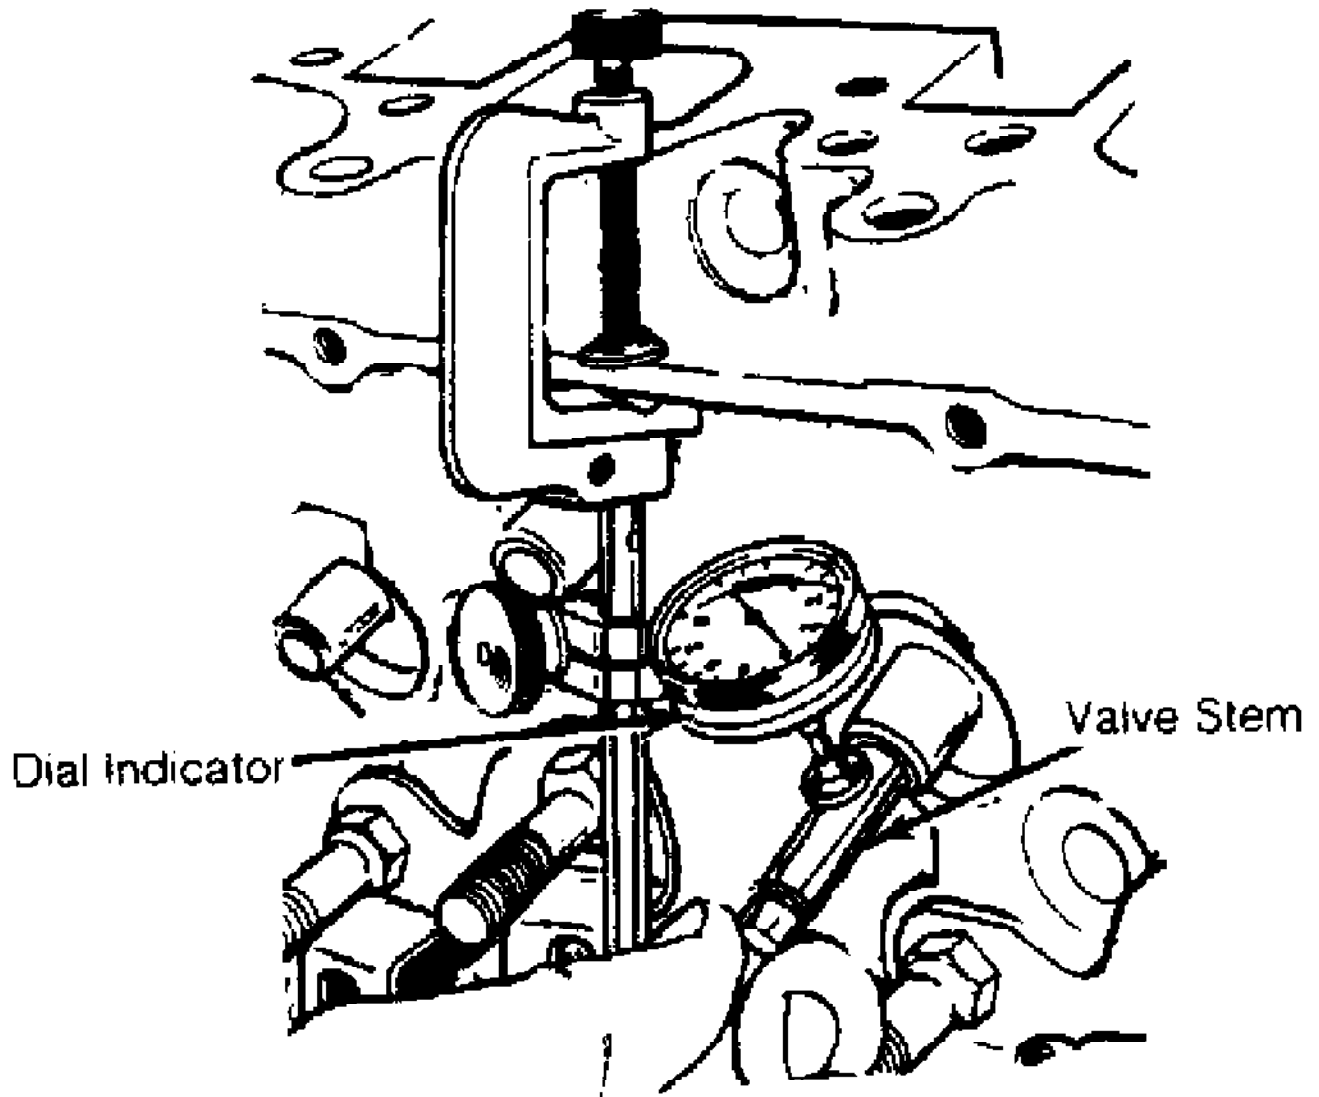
Measuring Valve Stem-to-Guide Clearance - Typical
